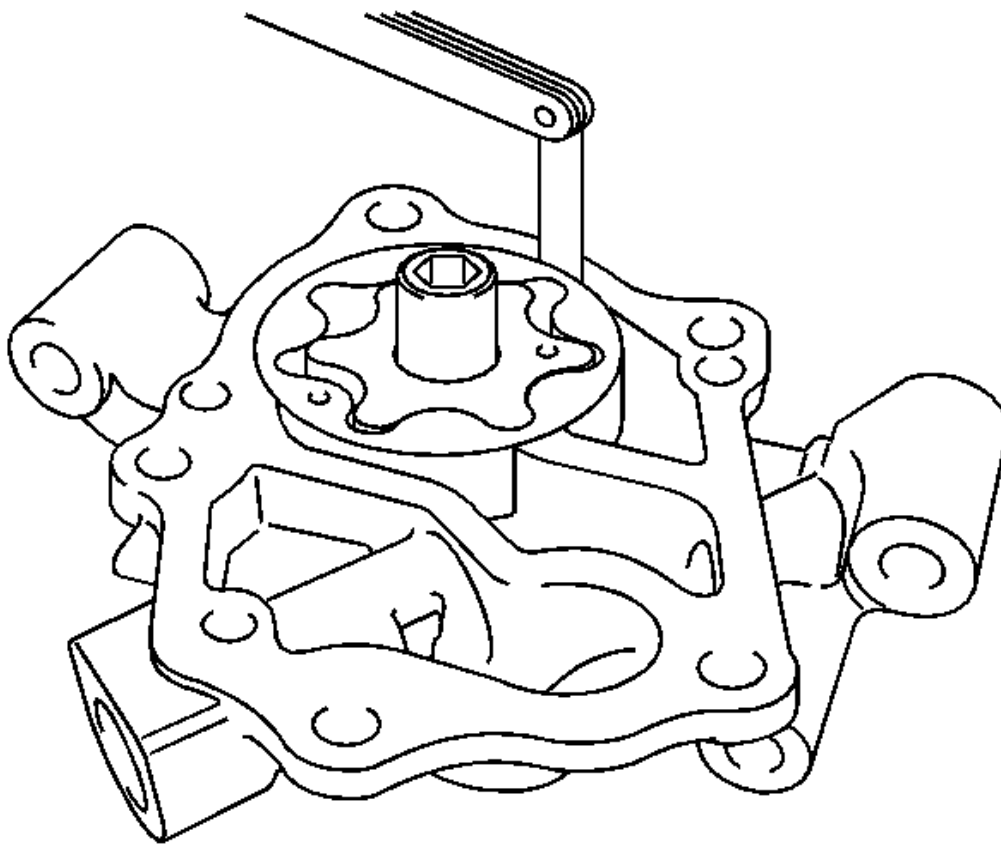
Measuring Oil Pump Driven Rotor-To-Body Clearance
